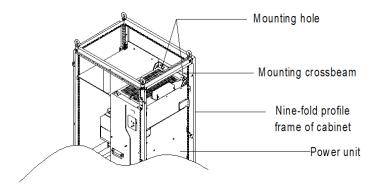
Three-dimension view of mounting a GD270 280-500kW VFD in a cabinet
